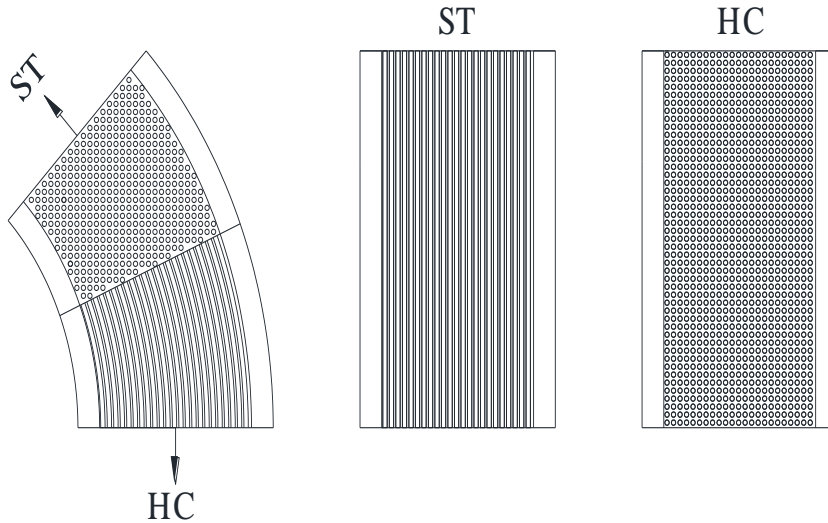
Radial [left] and axial [center & right] cutaways for tube placement in helical coil and straight tube heat exchangers with square pitches.
